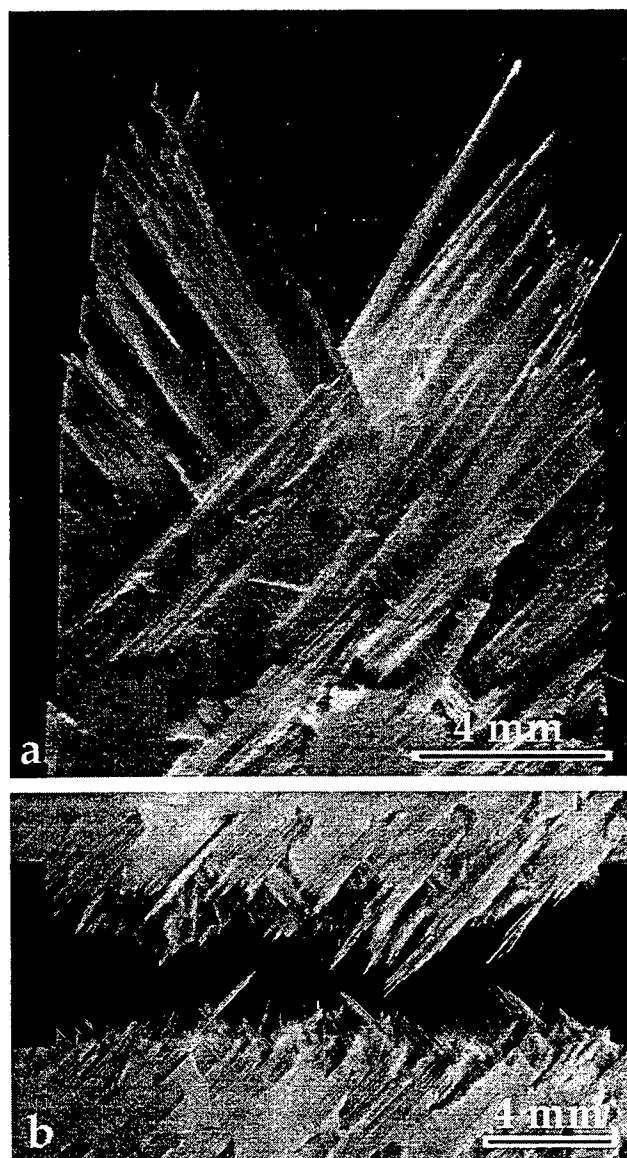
Fracture surfaces of composites in the $\pm 45^\circ$ orientation. (a) Unnotched N610 specimen 12 mm wide showing pull-out from the edges with minimal fiber failure. (b) Notched specimen ($a/W = 0.25$) showing extensive fiber failure on the fracture plane.
